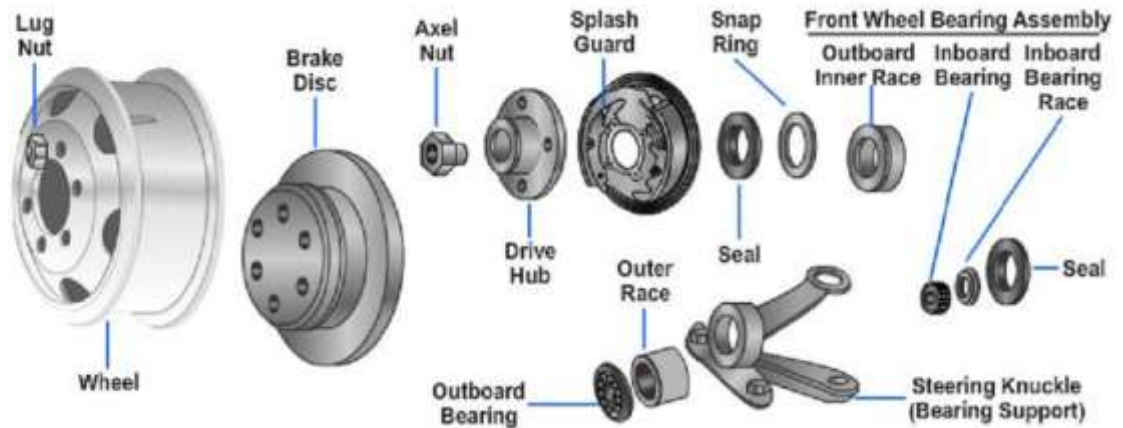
9 — View of a driving wheel bearing and hub assembly.
